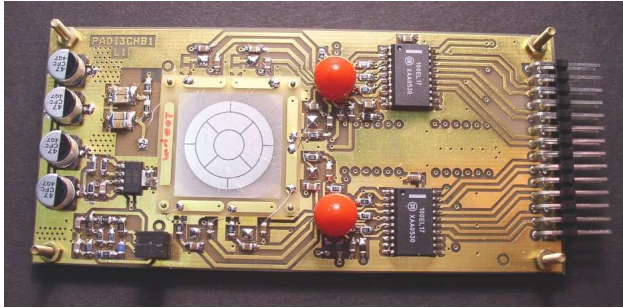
PCB with the p-CVD diamond mounted together with electronics. PADI chips (bellow red caps) are bonded directly to the PCB. The electrode layout is clearly visible on the diamond.
